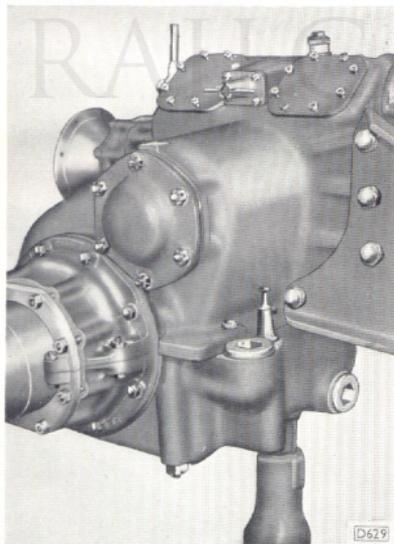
Method of supporting bottom half of final drive casing whilst removing torque arm.
